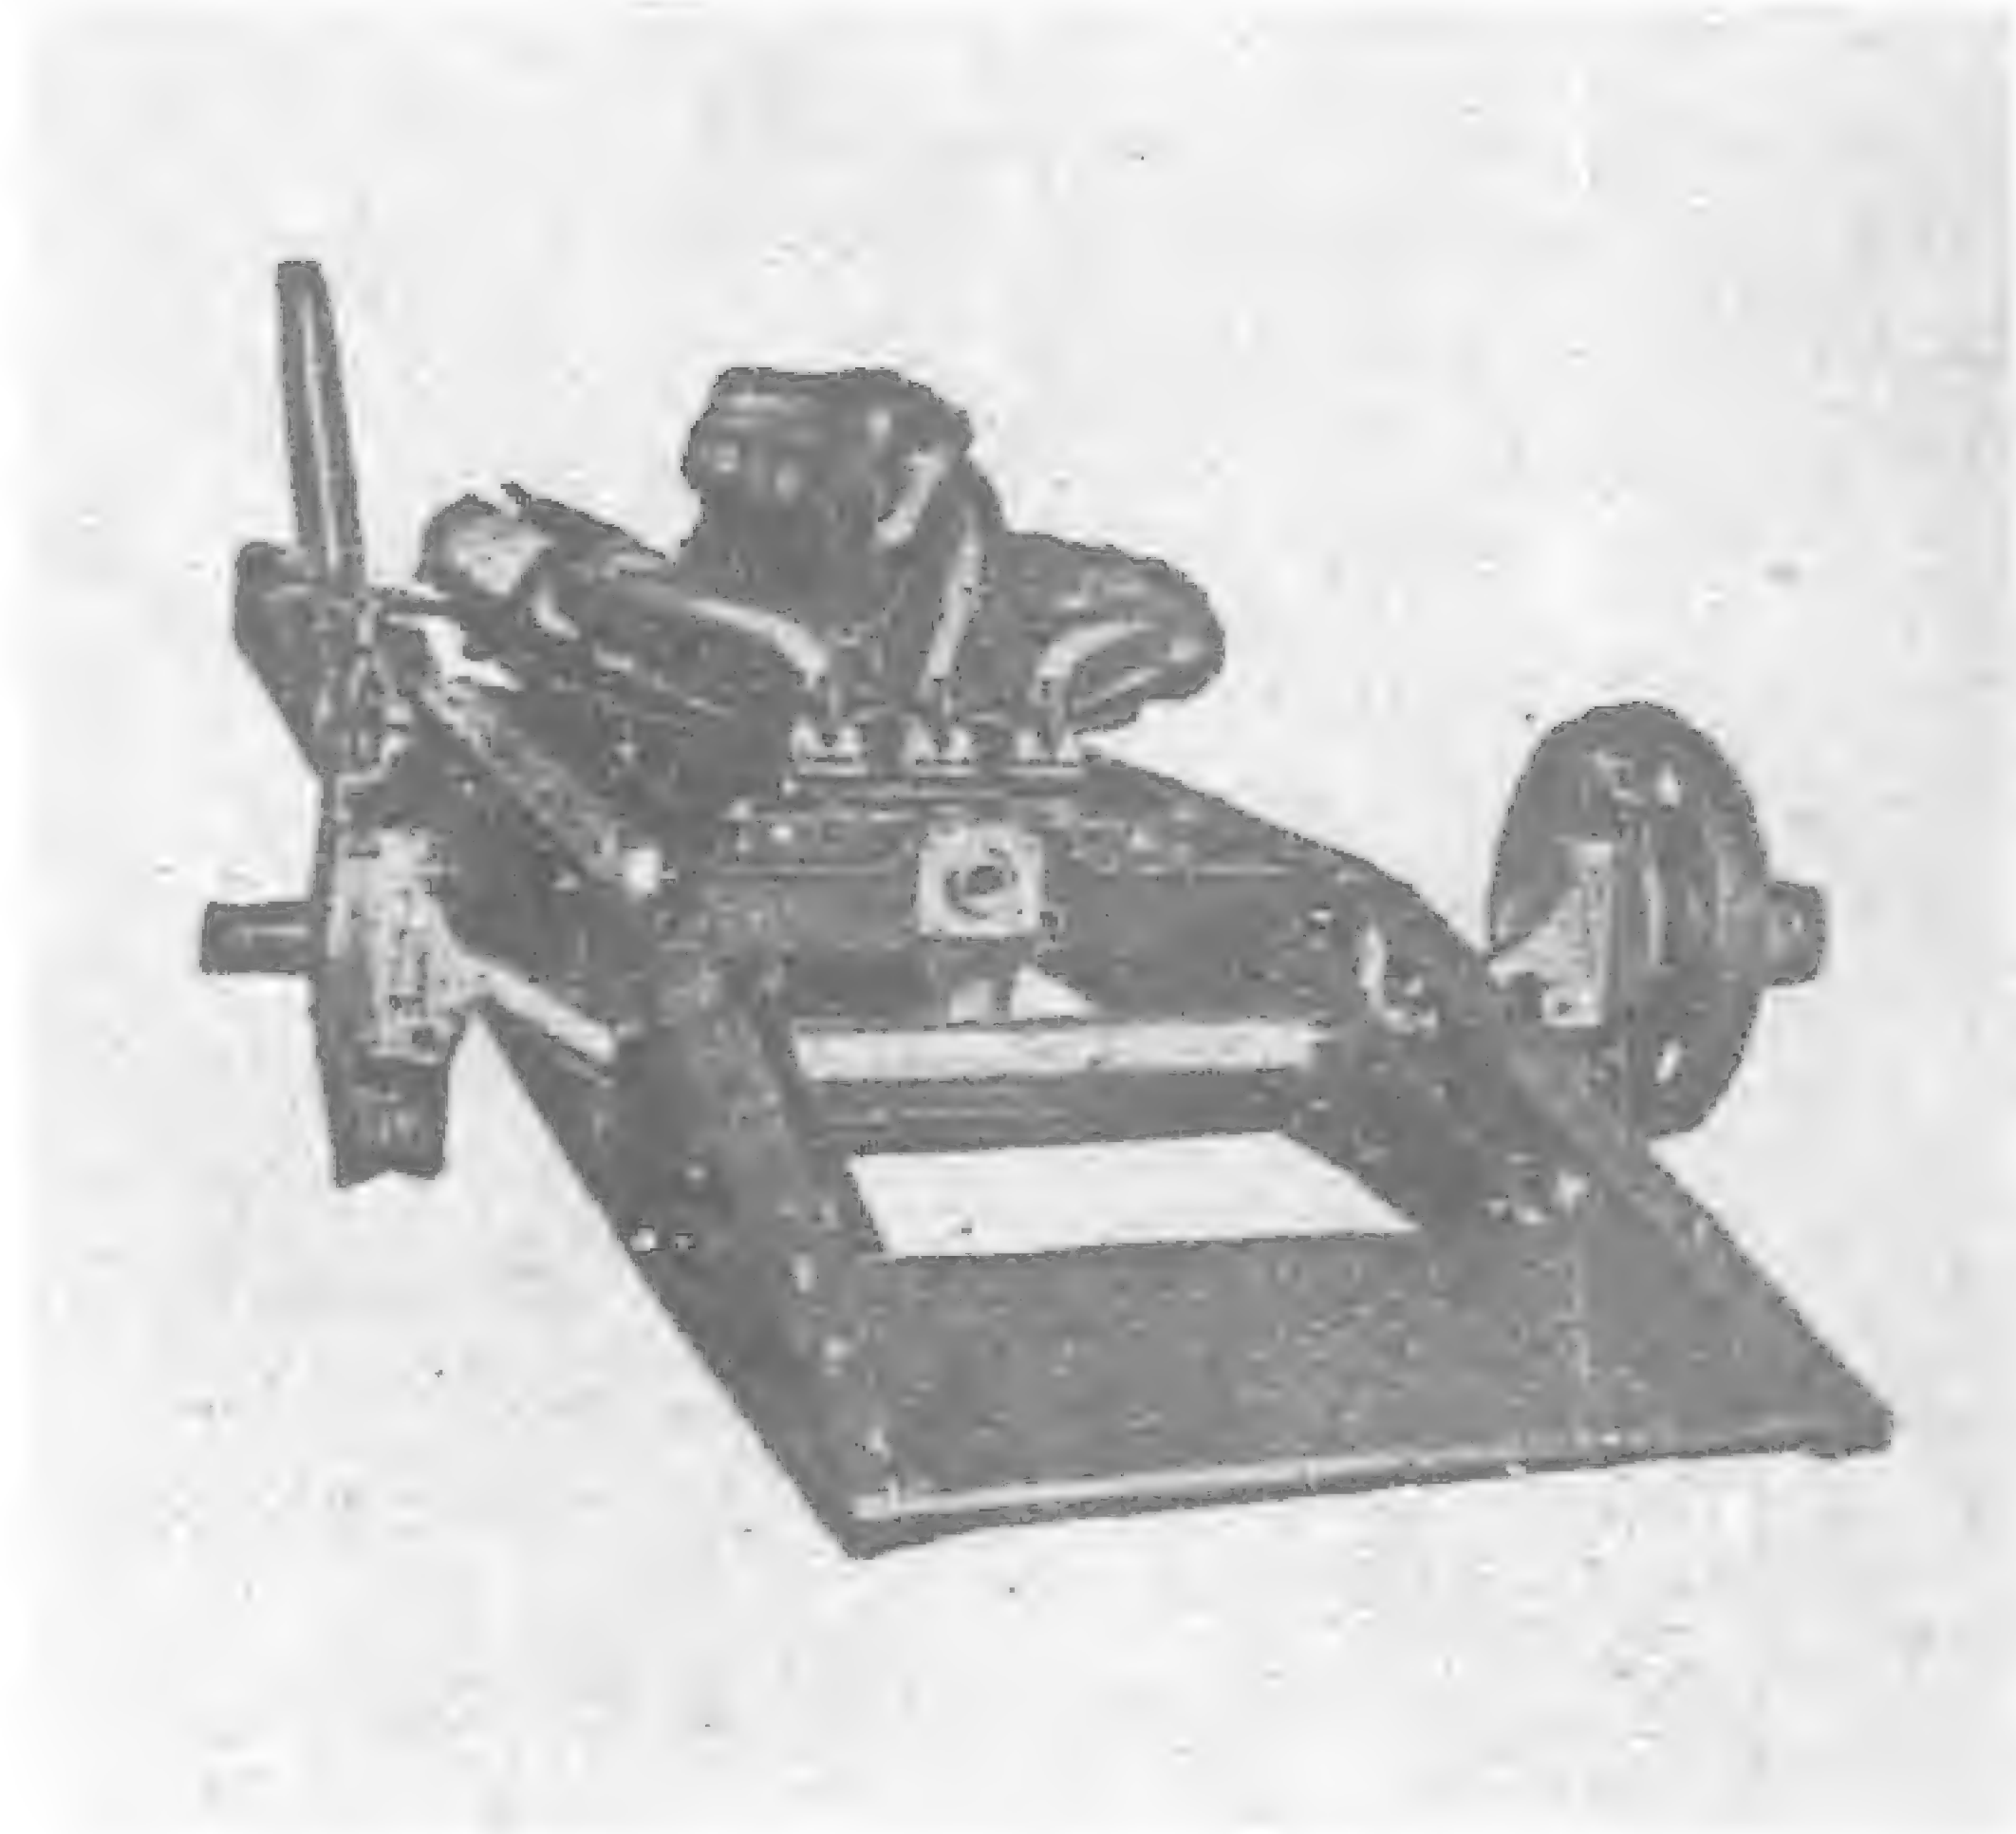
Frames and Front Axle of Racing Car. 3.5 per cent Nickel, 5 per cent Nickel and Nickel-Chromium-Molybdenum steels are used in all vital parts
